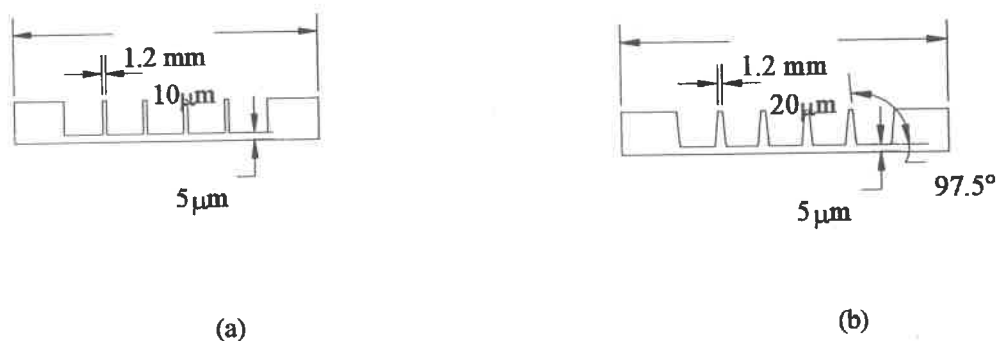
Drawings of the two packages that were needed for the RT experiments.
